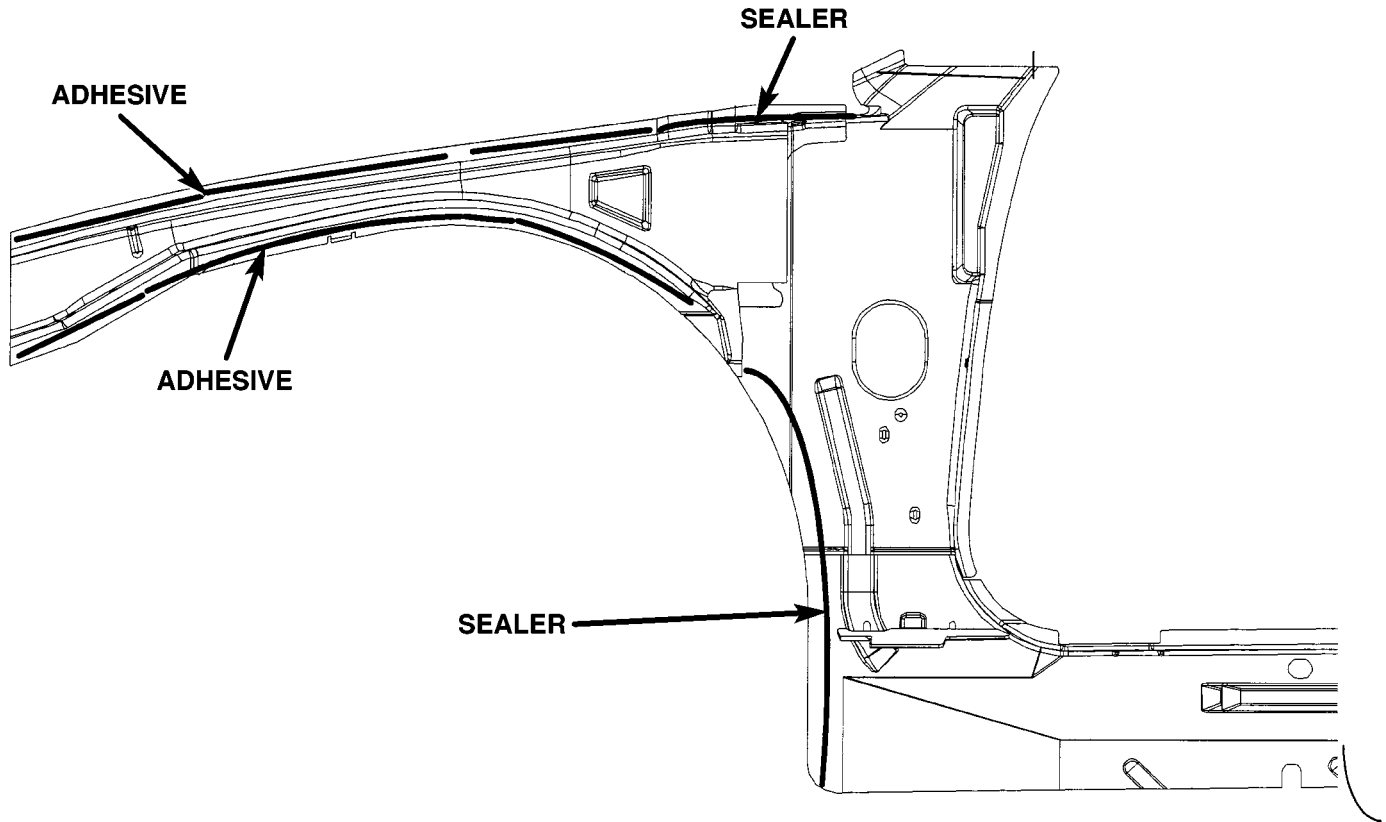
INNER & OUTER UPPER LOAD PATH BEAM, COWL SIDE PANEL
